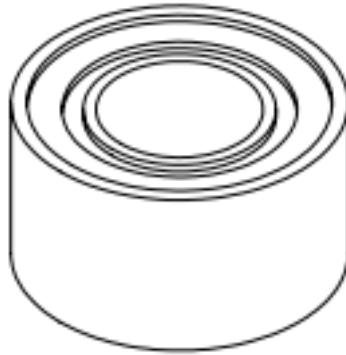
CAD drawing of the reactor vessel blowdown port.
